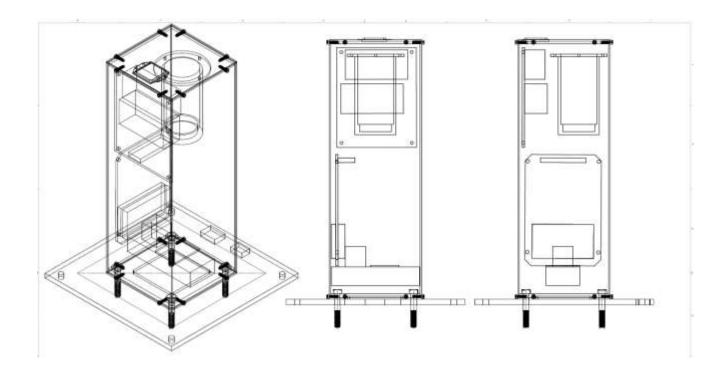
Mechanical drawing of the full payload assembly, including the detector housing, GPS antenna and Novatel board, detector board, and IMU. Not shown are the flight computer, daughter board and the new power and interface board, both of which will be stacked above the Novatel board.
